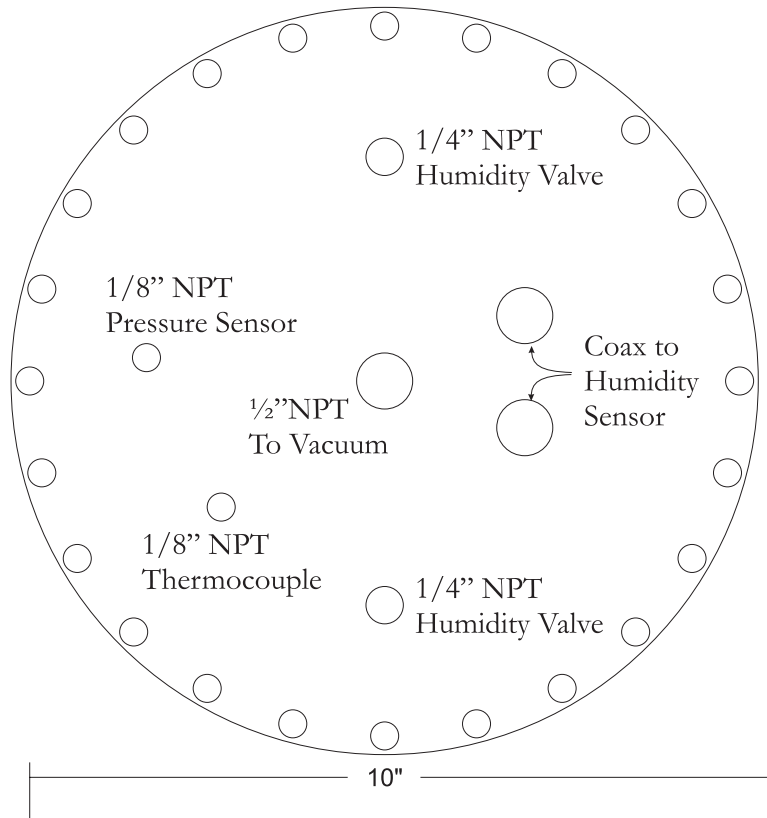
Schematic for the top flange for the large chamber. The flange is attached with 24 bolts.
